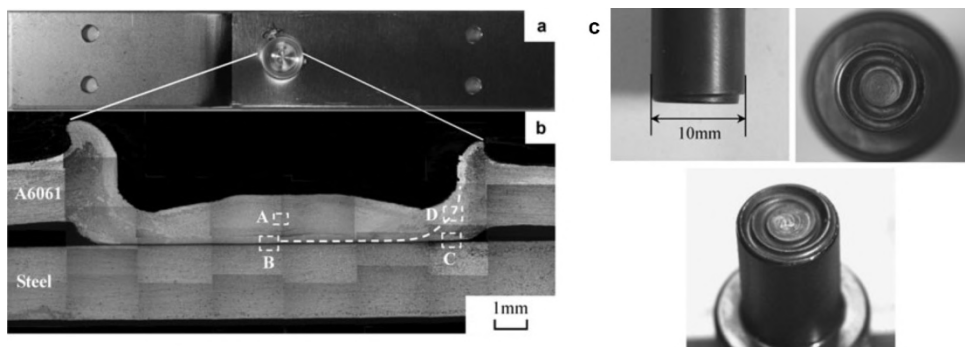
Top view of dissimilar welding between Al6061 and steel a) corresponding macroscopic appearance of the cross section welded zone b) photographs showing the tool geometry c).
